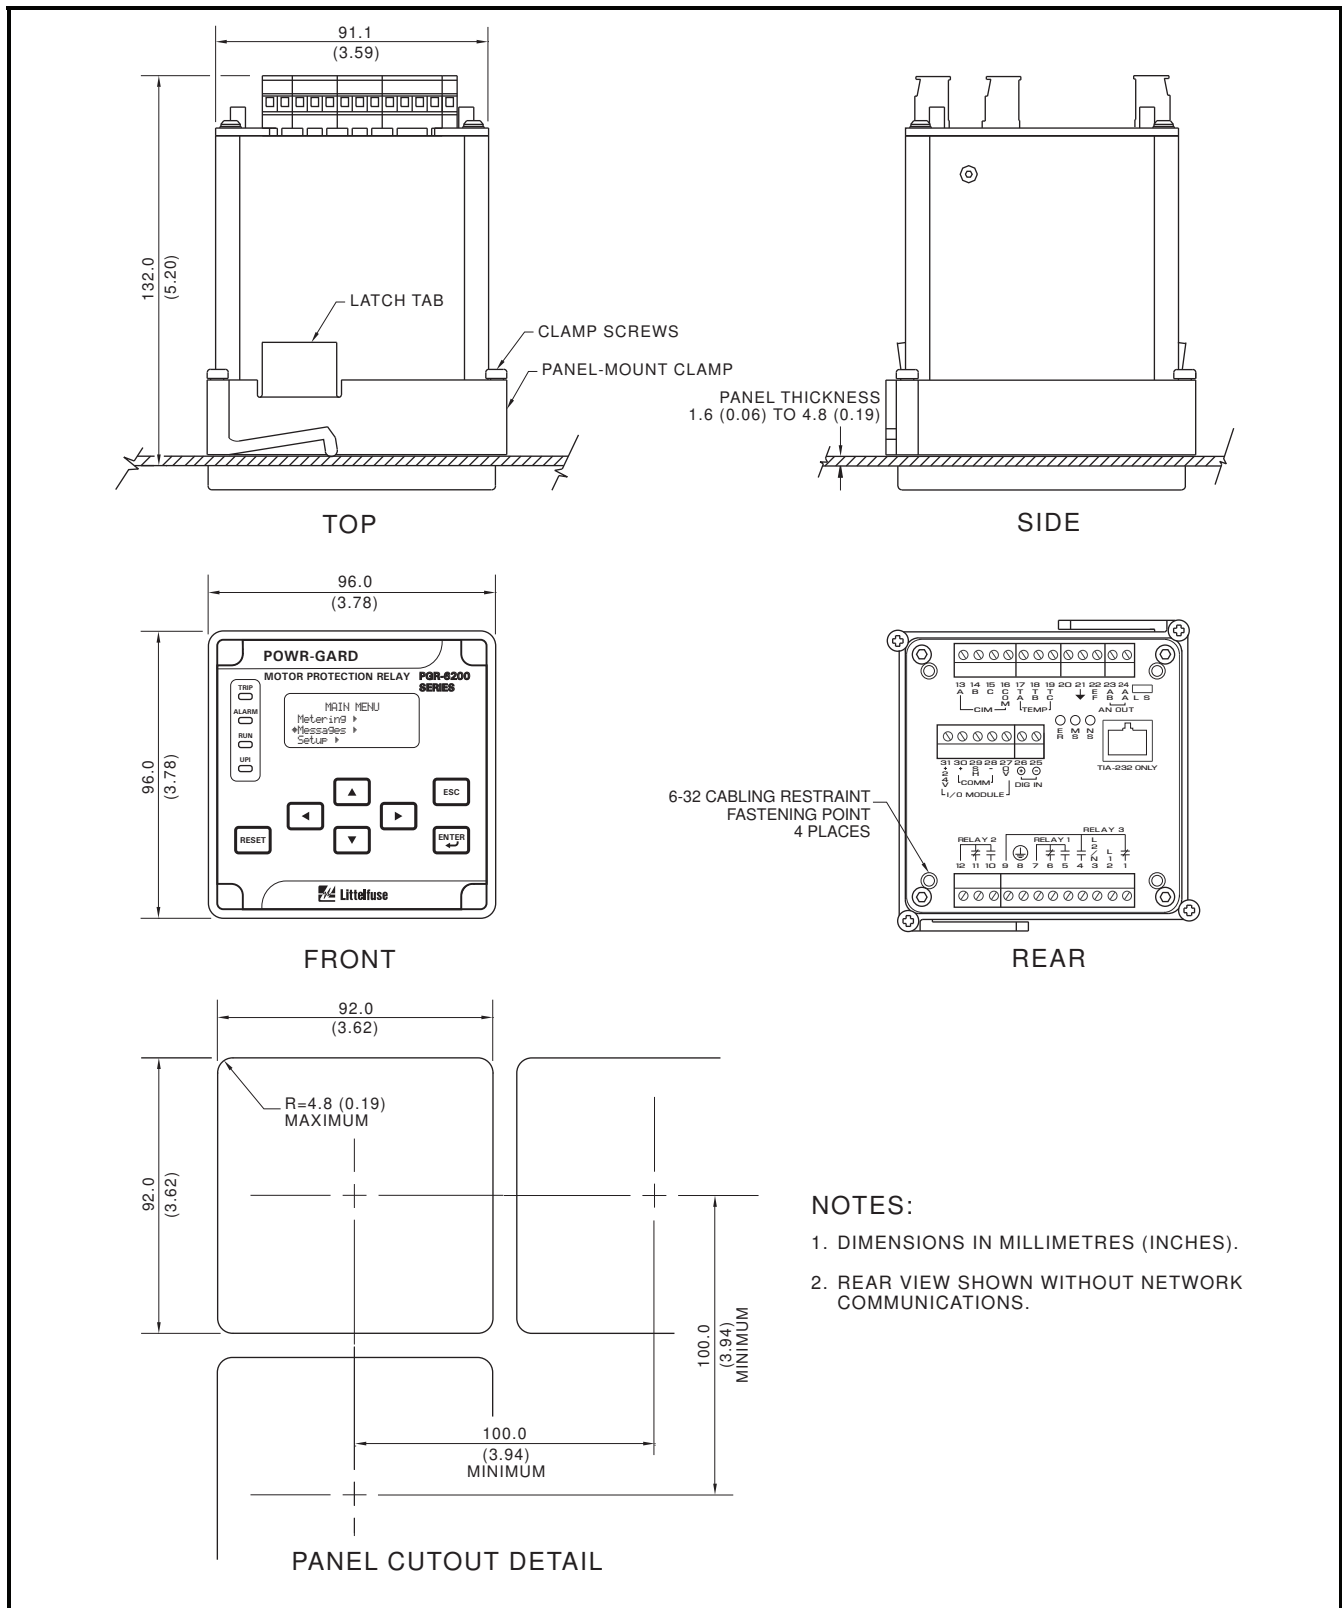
PGR-6200 Outline and Panel-Mounting Details.
